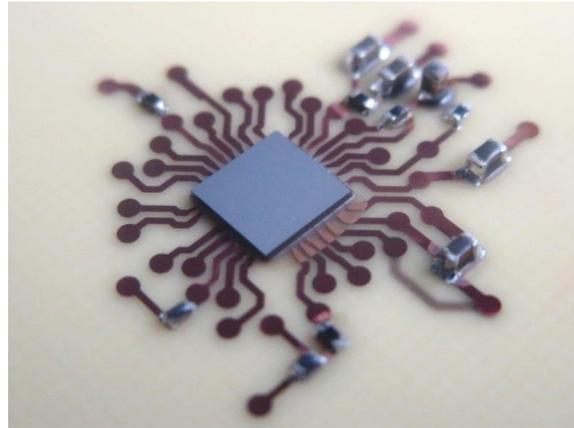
Interposer with assembled bare die as Flip Chip and passive components.
